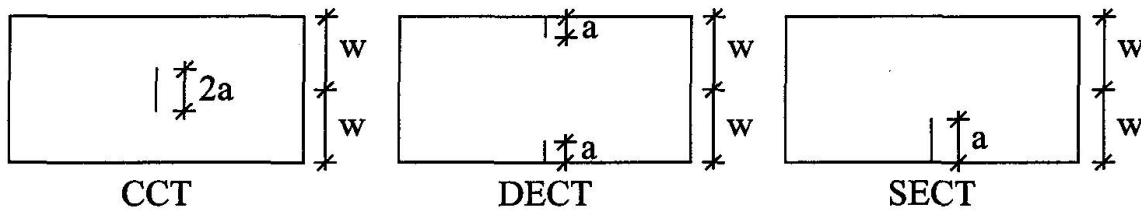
Basic plate models and crack configurations for fracture mechanic assessment CCT: plate with centre crack -, DECT: plate with double edge crack, SECT: plate with single edge crack in tension
